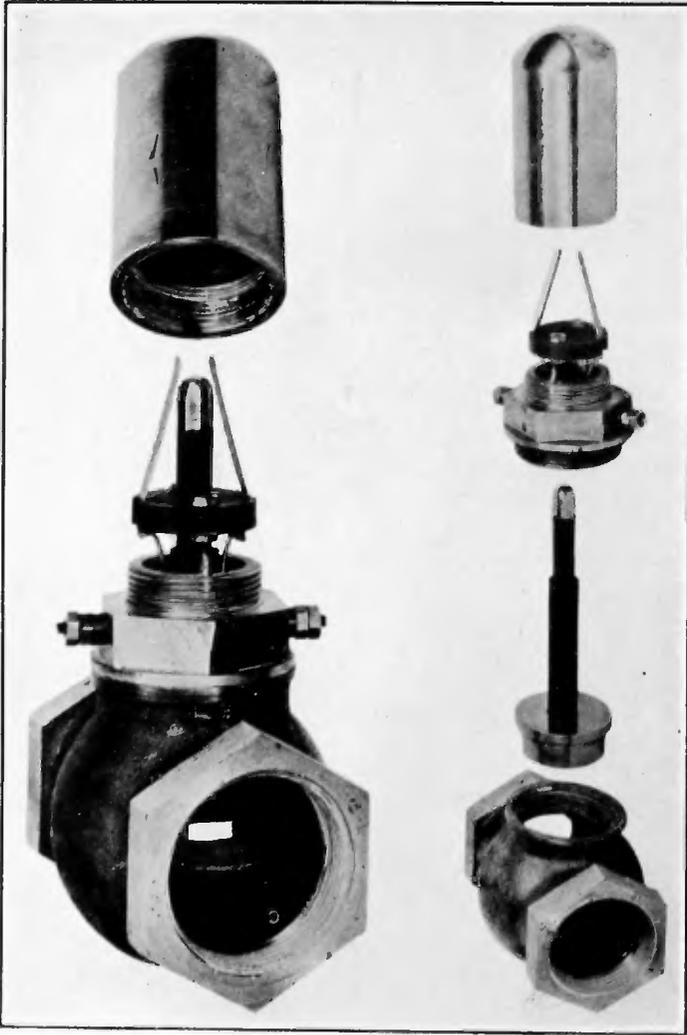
Partially Assembled and Exploded Views of Waterflow Alarm
